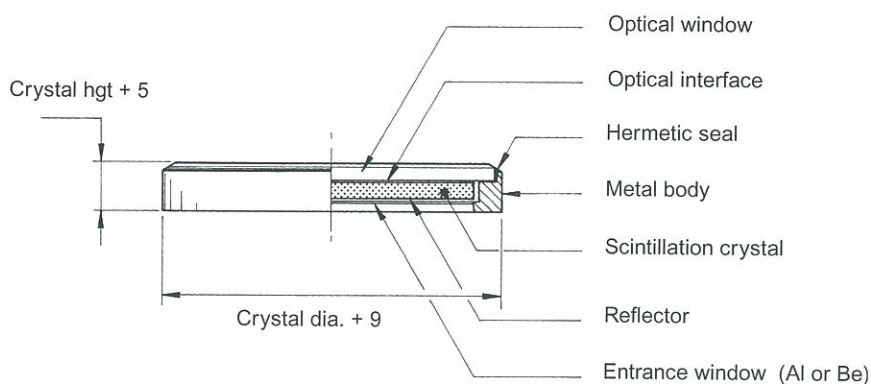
Example of thin-window CD-style assembly: .. CA/CD ..
